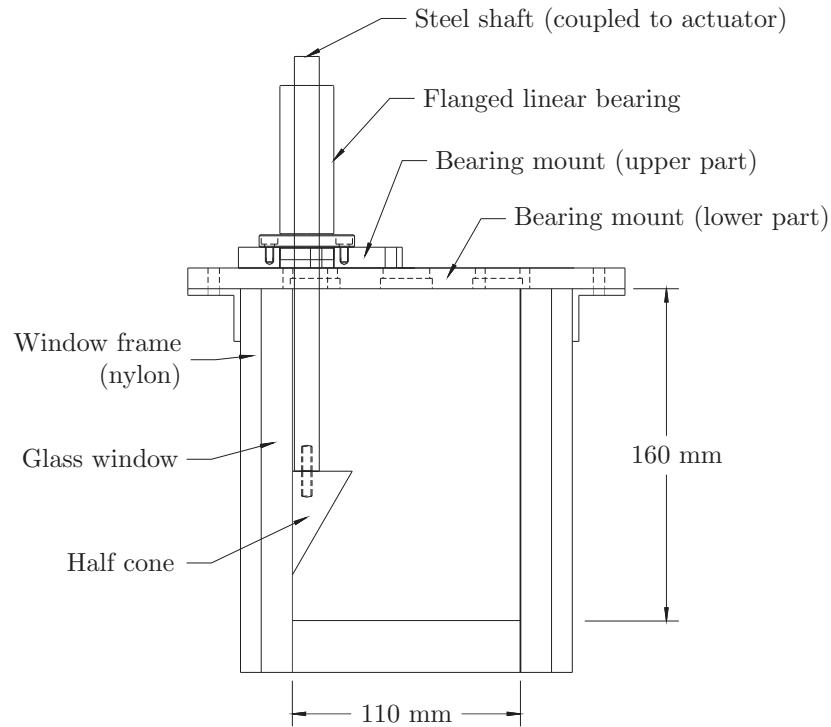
Attachment of cone to sample box with linear bearing (fixings not shown)
